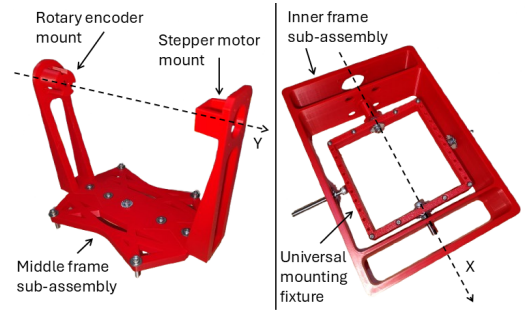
Middle frame subassembly (left) and inner frame subassembly (right) with rotational axes drawn.
